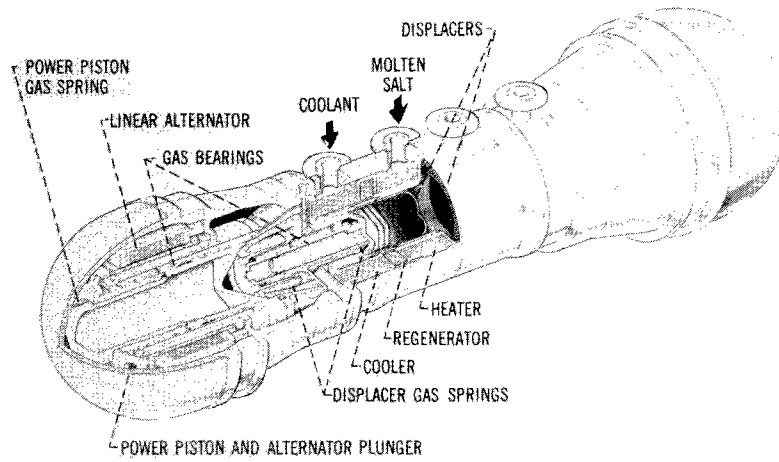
25-kW_E SPACE POWER DEMONSTRATOR ENGINE.
